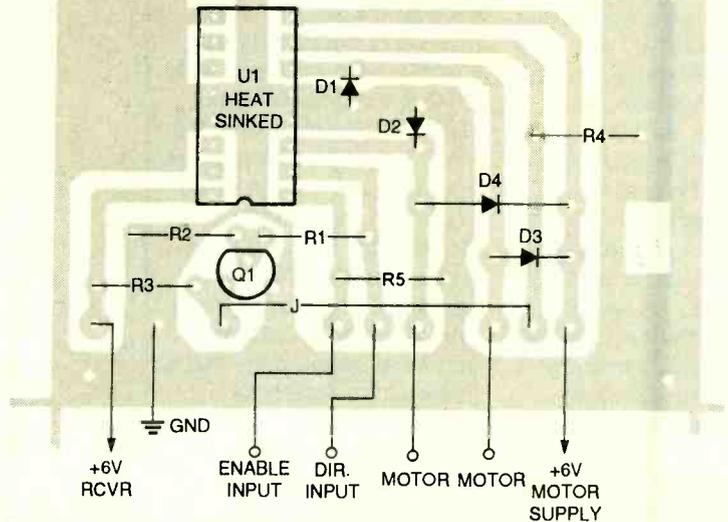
Here is the motor driver board's parts-placement diagram. When assembling this portion of the system, don't forget to attach a clip-on heat sink to the LM18293, as it may be called upon to deliver significant amounts of current.
